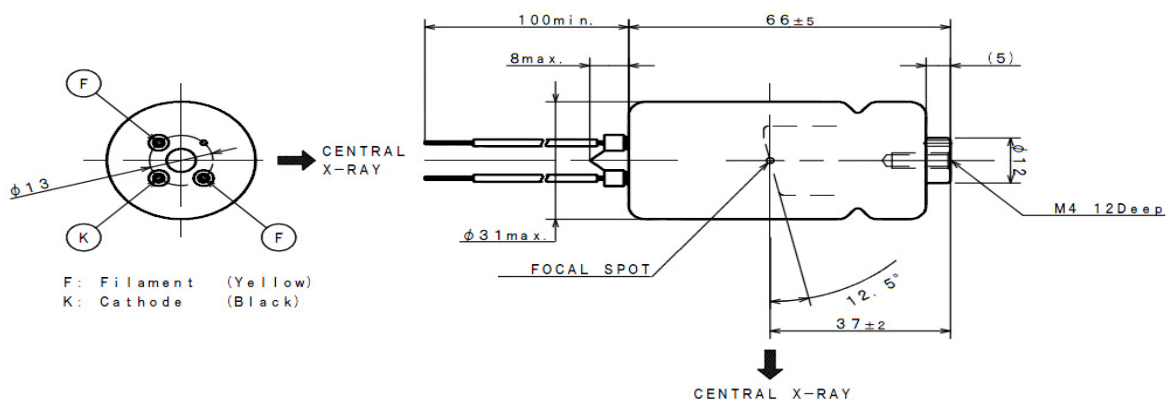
Toshiba D-041 X-ray tube outline drawing
